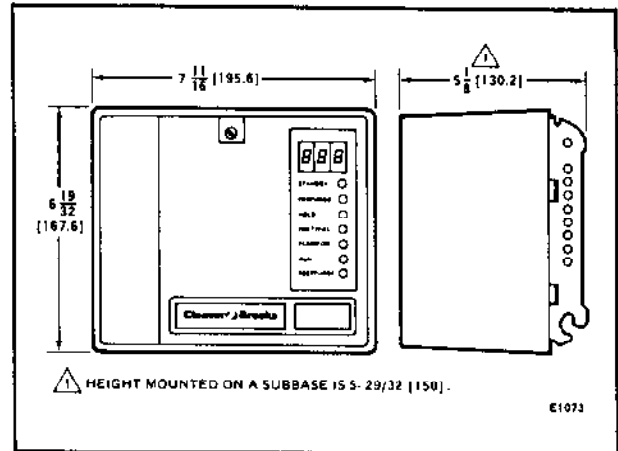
MOUNTING DIMENSIONS OF THE CB70 (in in.).
